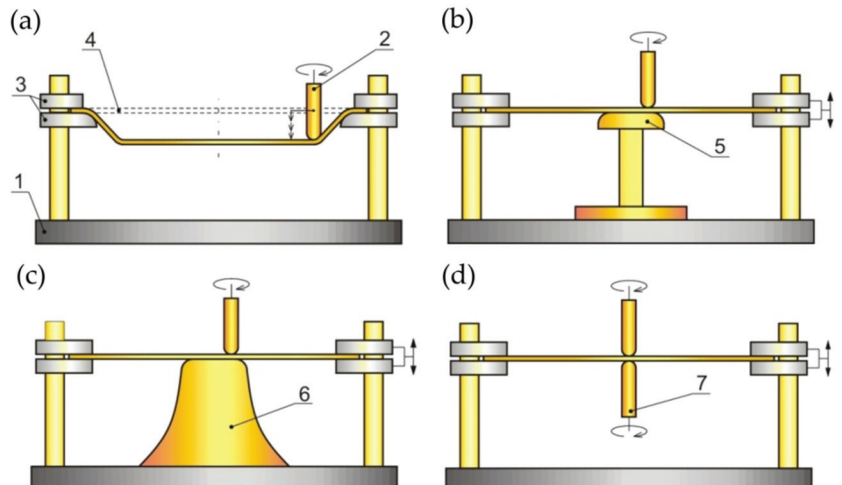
ISF Processes: (a) SPIF; (b) TPIF with a partial die; (c) TPIF with a specific die; and (d) IFWCT: 1—clamping device, 2—forming tool, 3—plate holder, 4—workpiece (initial position), 5—partial die, 6—specific die and 7—auxiliary forming tool.
